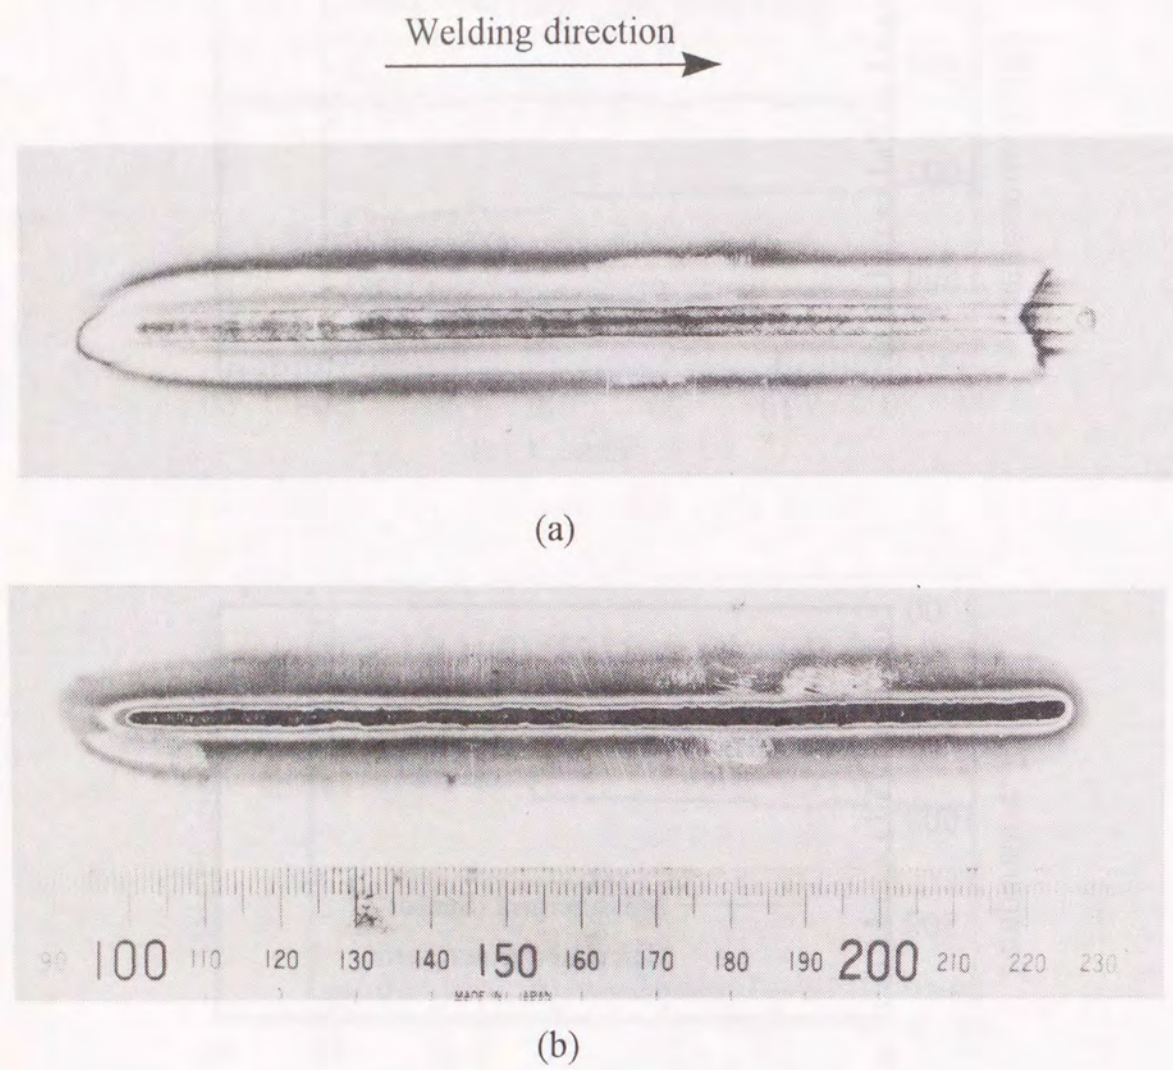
Bead appearance after GTA welding in-process of real-time optimum control
